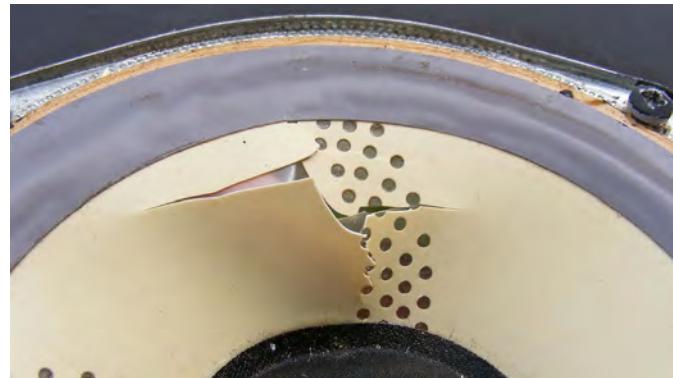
A close-up of the cone cracking. No replacement diaphragm assembly could be found, so more magnets for the children.
